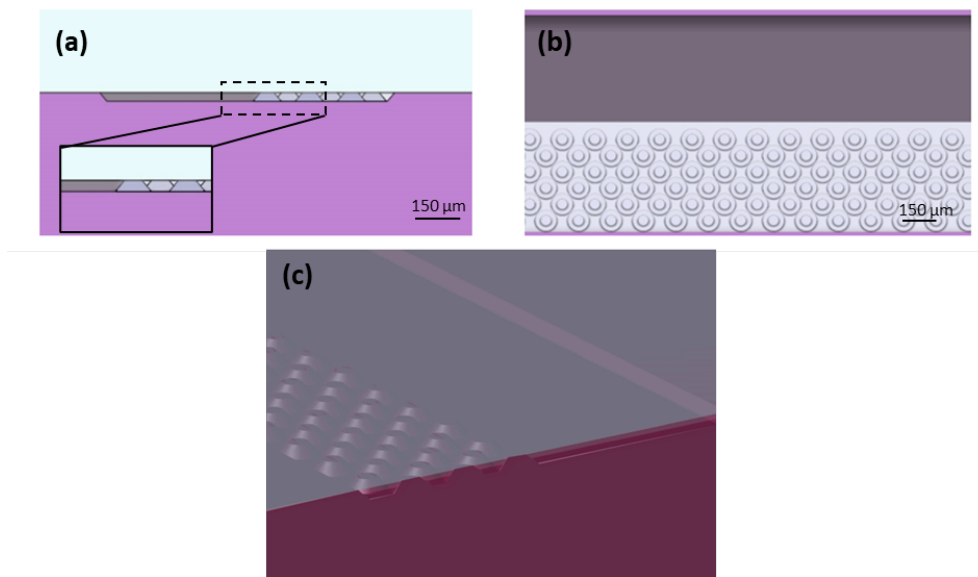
Cross section (a), top view (b) and 3D model (c) of a channel engraved by using wet etching.
